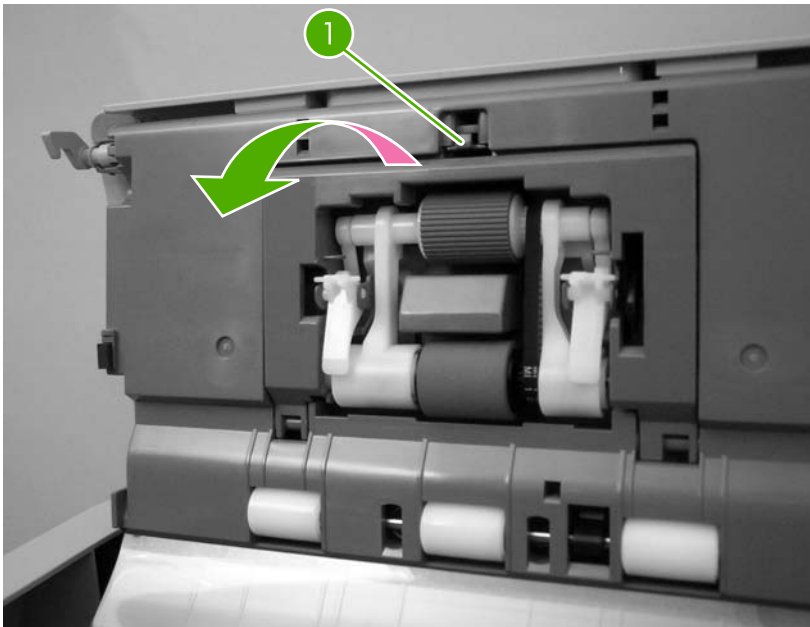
Remove the ADF pickup and feed rollers (2 of 3)
